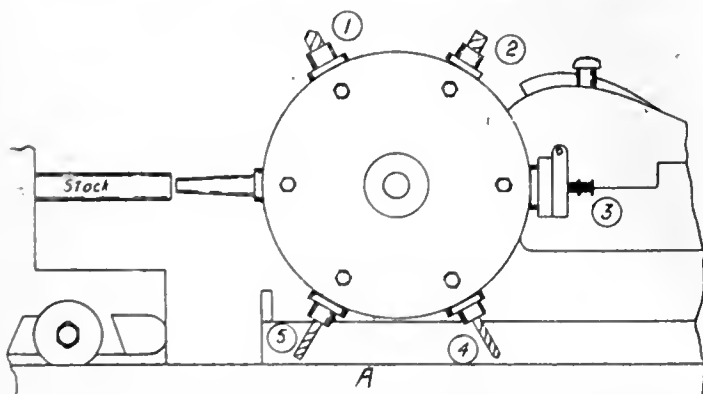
TOOLING ARRANGEMENT OF TURRET HEAD AND CROSS-SLIDE.
